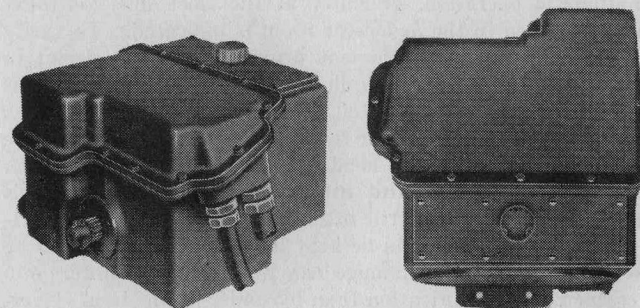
Indicator-regulator M2, showing adjustable coupling in drive shaft (left) and synchronizing adjusting shafts (right).
